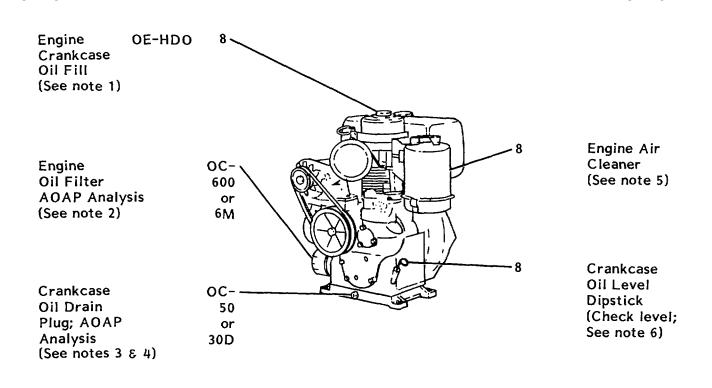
Welder/Generator Lubrication Instructions (Sheet 1 of 2)
